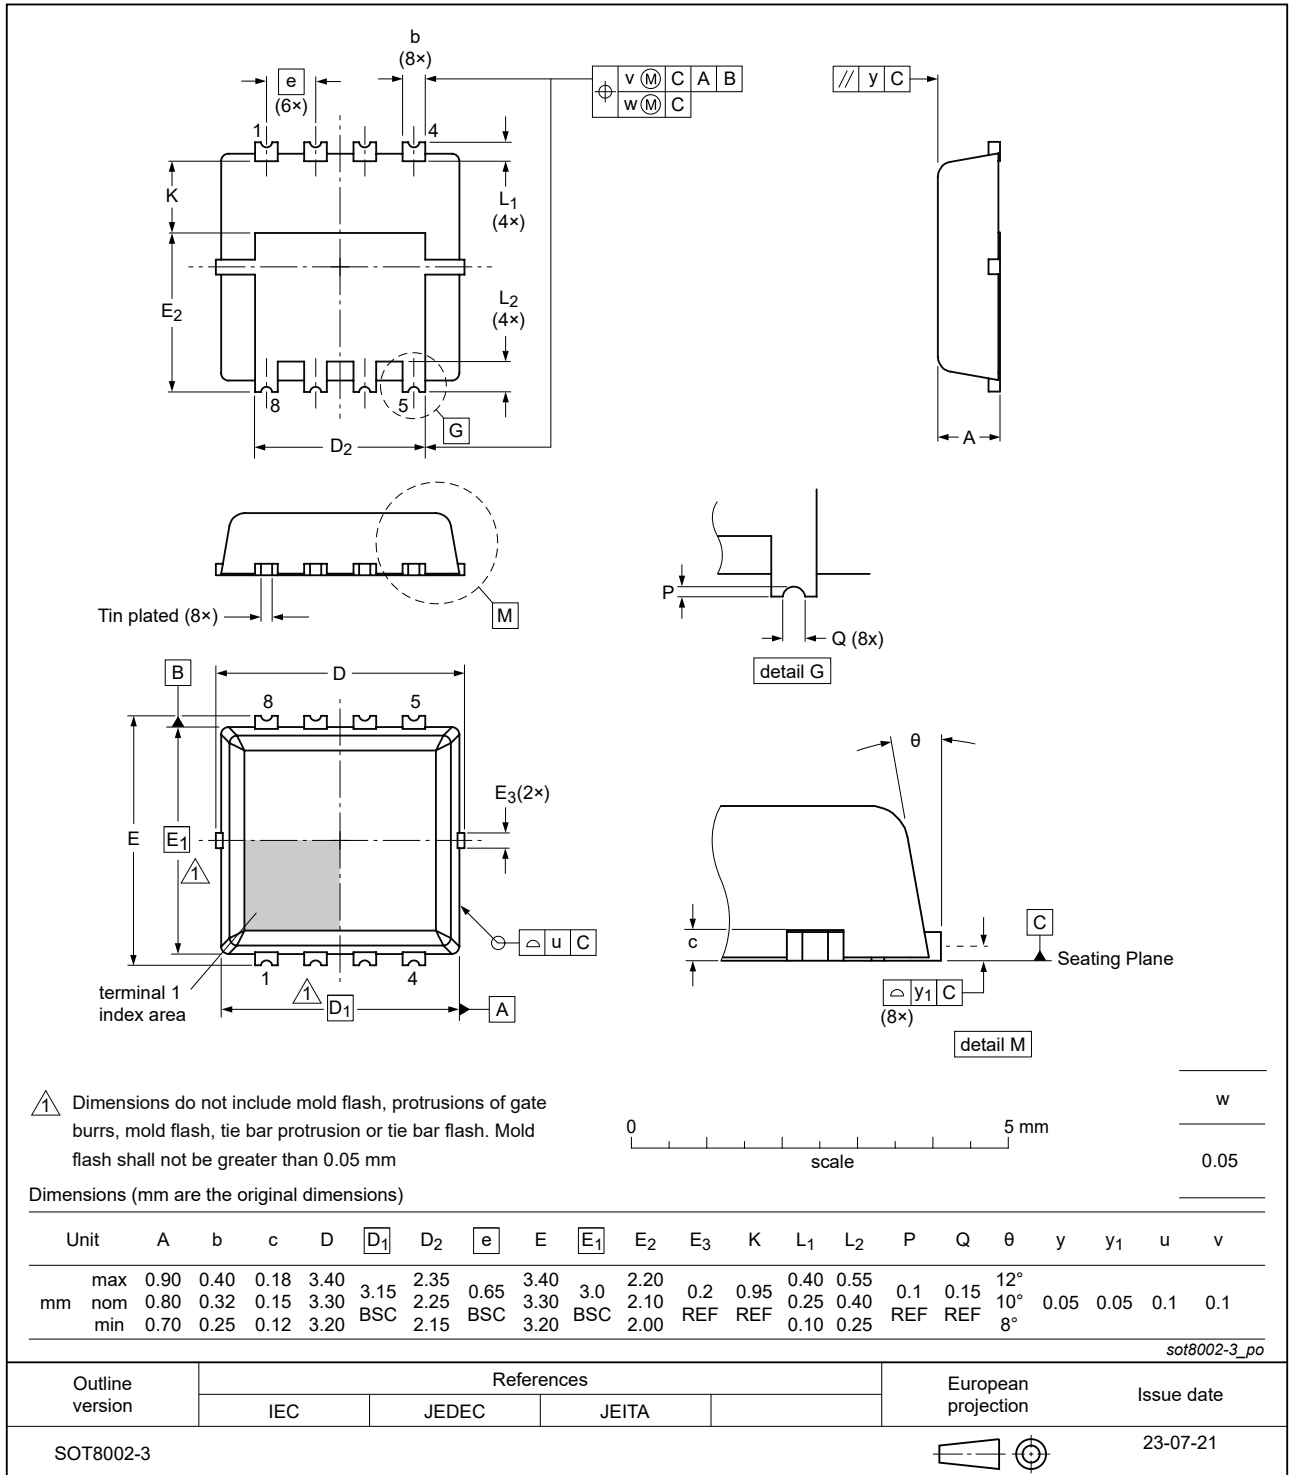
Package outline MLPAK33 (SOT8002-3)
